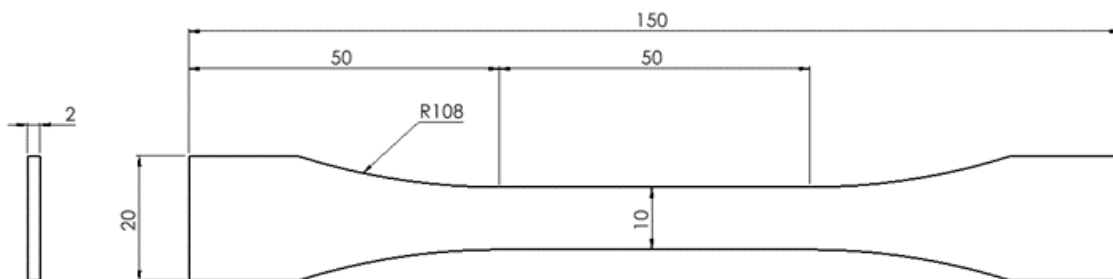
BS 2782 standard tensile specimen geometry (dimensions in mm).
